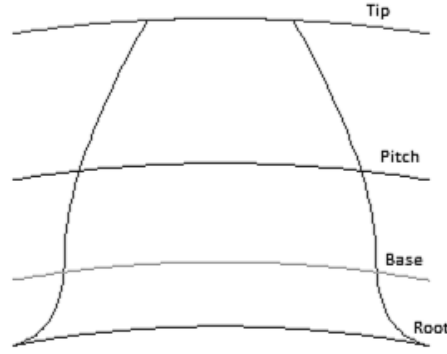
Picture that shows the terminology that is used for the diametric sections of a gear tooth.
